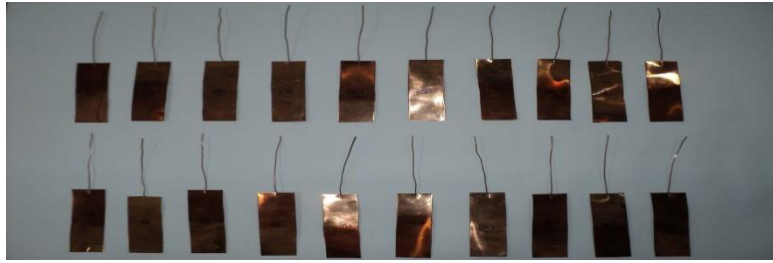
Welded specimen (copper sheets 0.2mm thickness)
